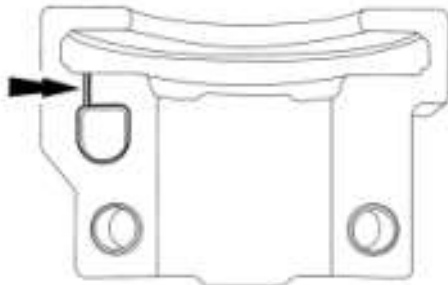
Identifying Camshaft Bearing Caps Loosening/Tightening Sequence
